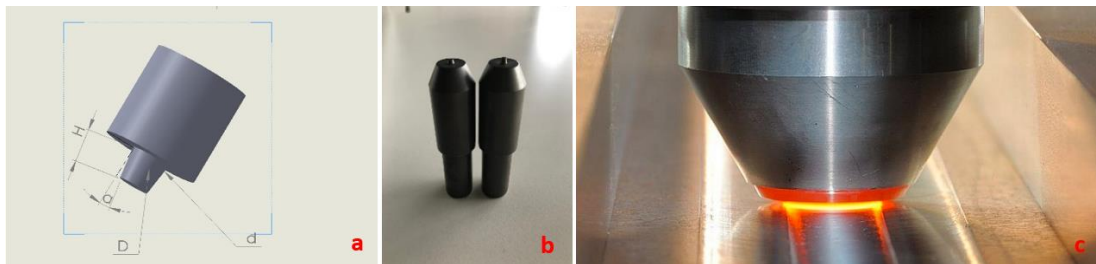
Tool pin desing (a), Tool pin (b), FSW butt weld (c).
